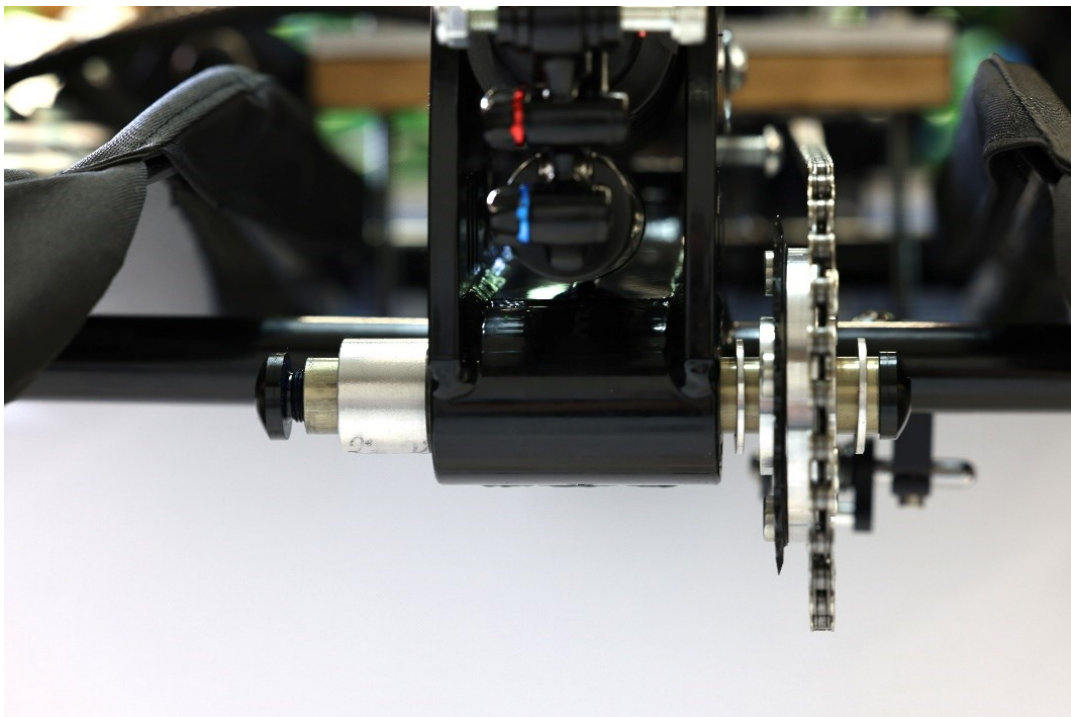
Order of assembly of the rear wishbone axle, intermediate gear, washers, and spacer bush
